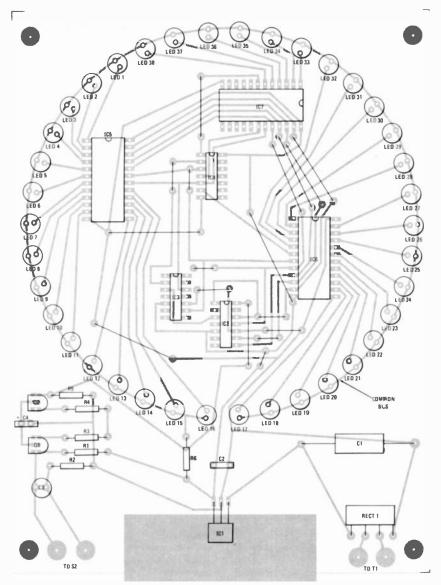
PARTS PLACEMENT shown from component-side of board. LED anodes connect to common huse
